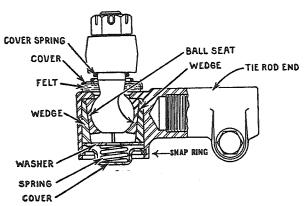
, Tie Rod Assembly—F-400, F-450, F-500, F-600, F-700, F-800 Axle
